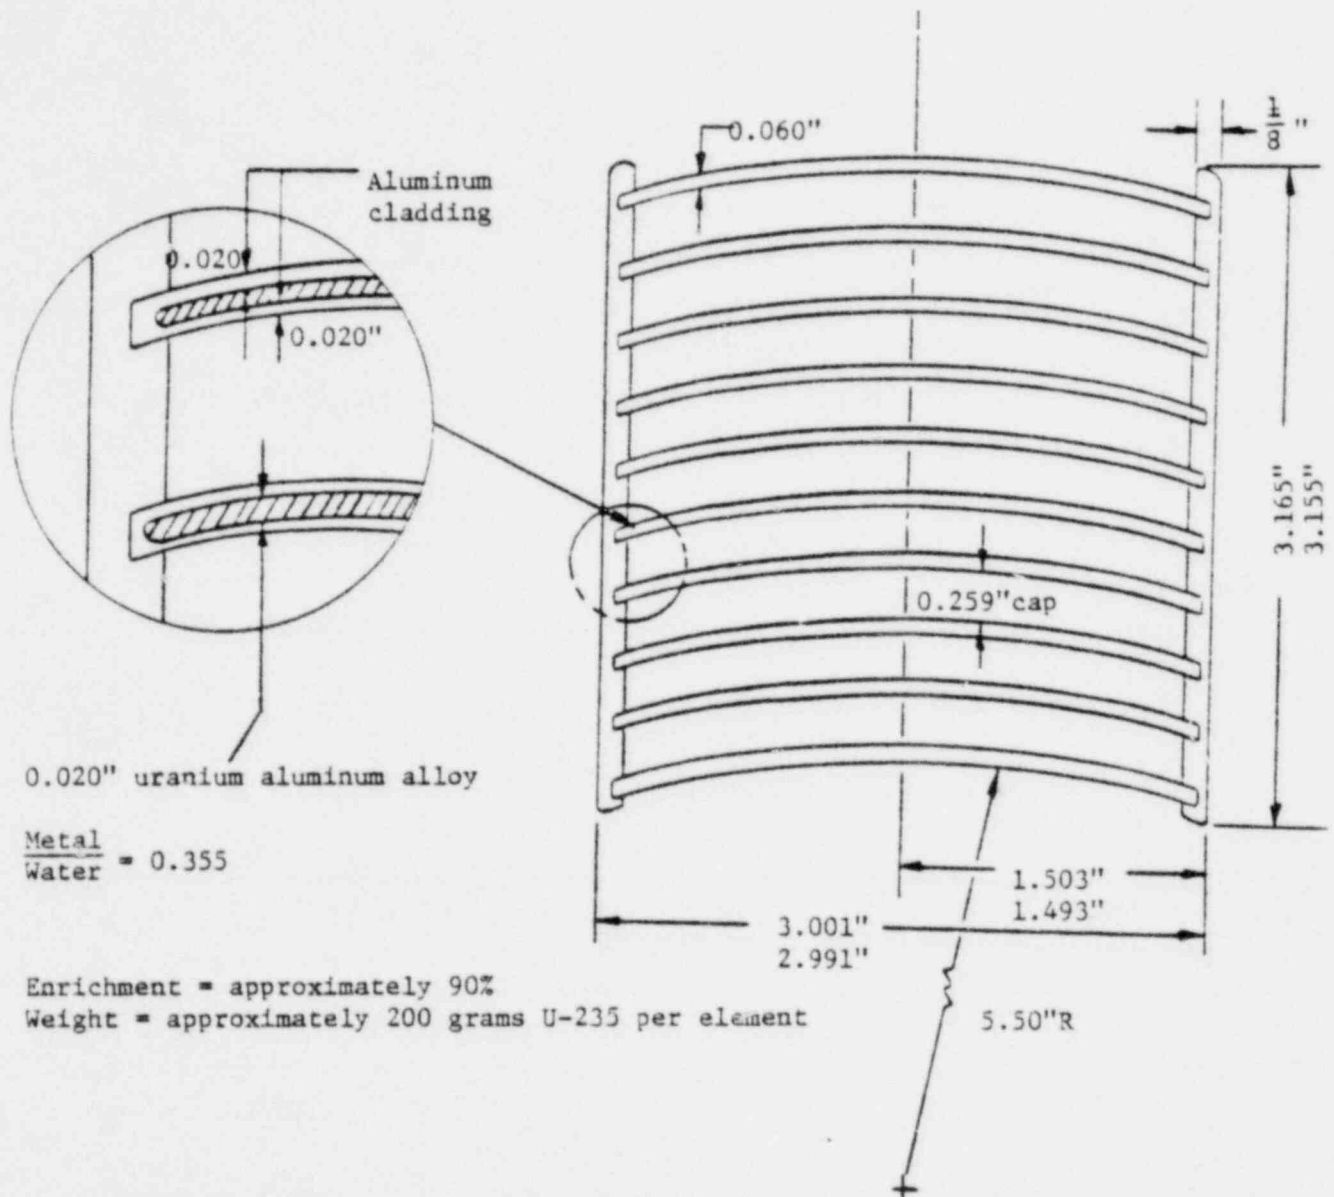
STANDARD FUEL ASSEMBLY FOR BATTELLE RESEARCH REACTOR
